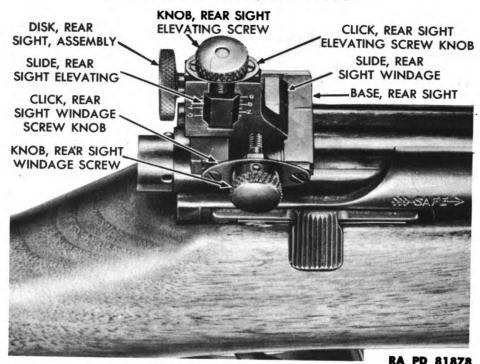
Rear Sight Group Assembly Mounted on Stevens Rifle, Cal. .22, Model 416-2 — Right Top View
